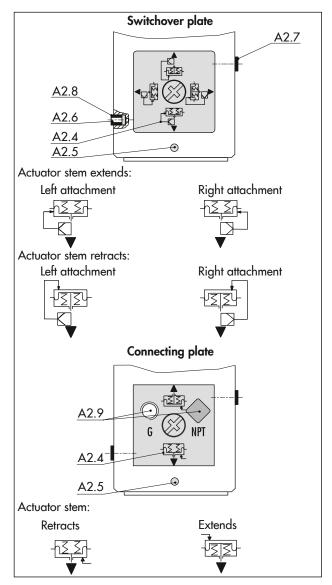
Switchover plate and connecting plate on Type 3277-5
